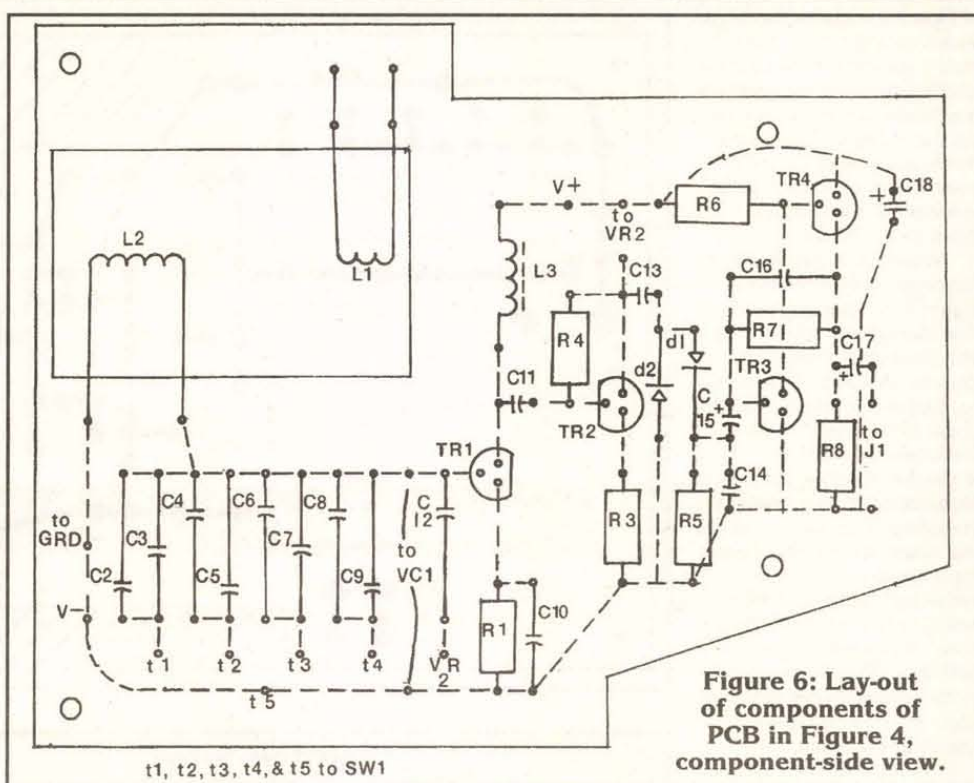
Lay-out of components of PCB in Figure 4, component-side view.
